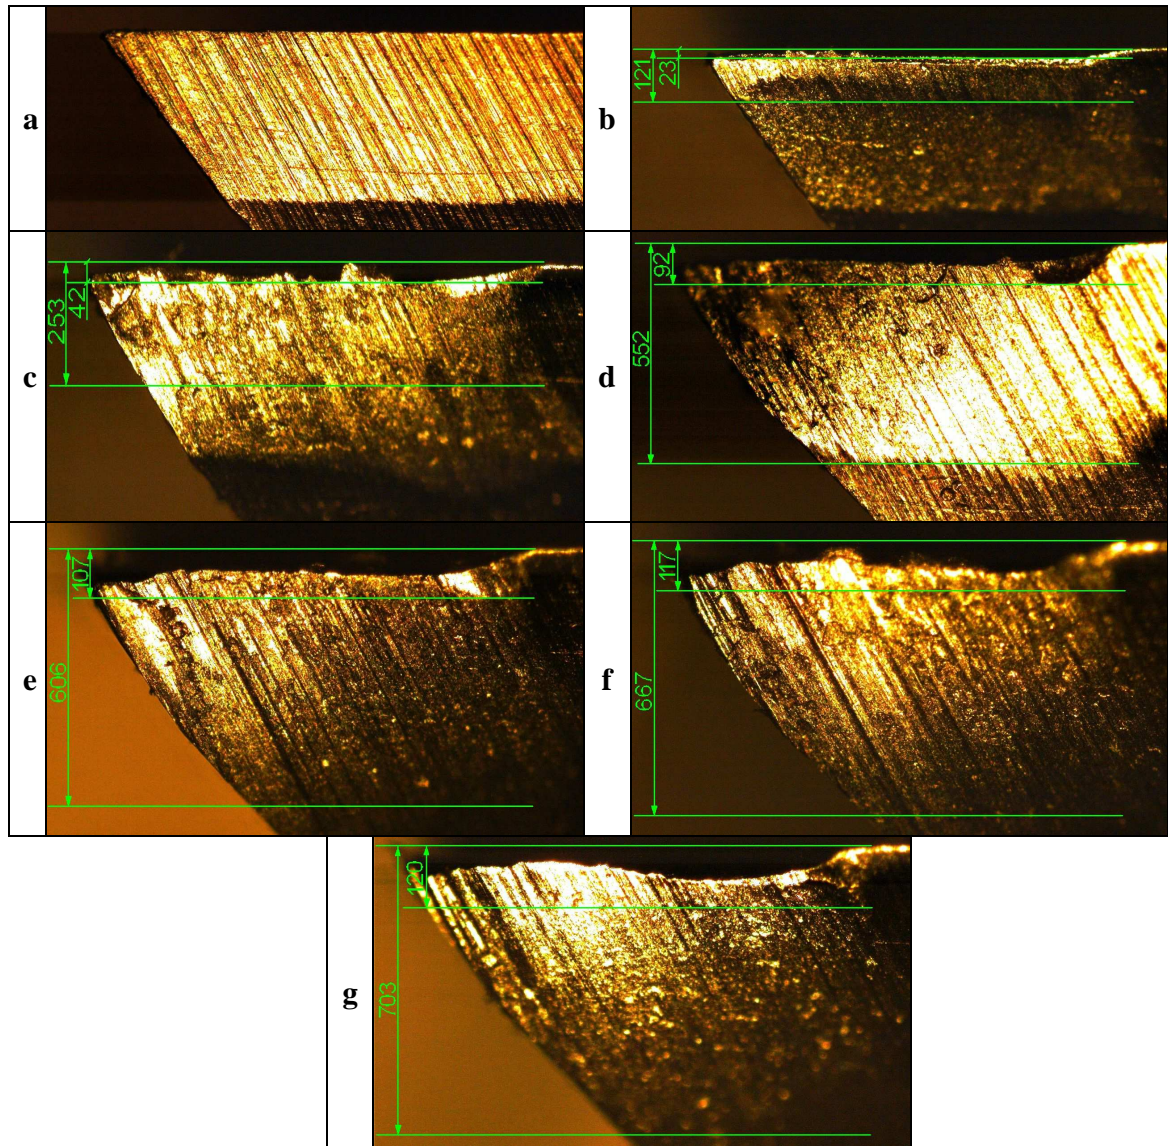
MTE 9mm end mill tooth # 3 trochoidal toolpath clearance face wear a) Fresh tool, b-g) After pass 1-6 (each 54 mm length, 27 mm width, 1 mm depth).
